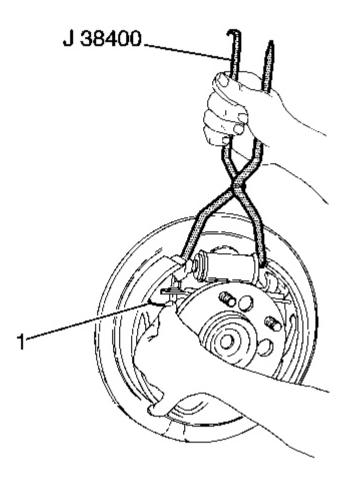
Using J38400 Courtesy of GENERAL MOTORS CORP.
